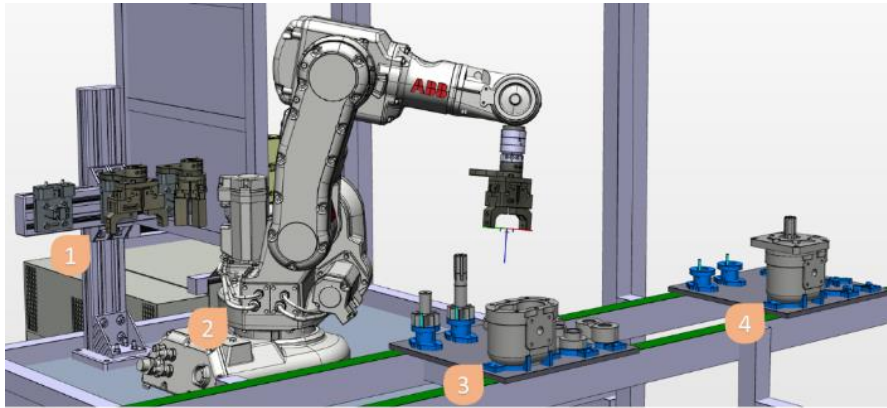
Typical setup of a robotic assembly cell: tool storage unit (1), robot with modular gripping system (2), parts to be assembled (3), finished functional product (4).
